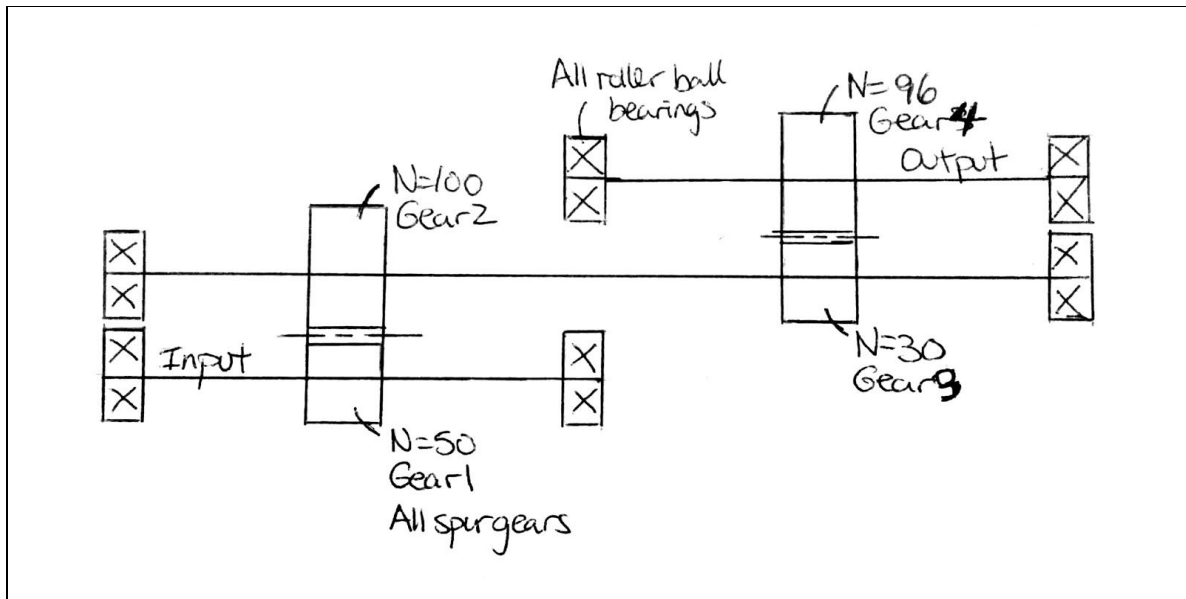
Solution 1 - Distinguished by Spur Gears and Parallel Shafts
